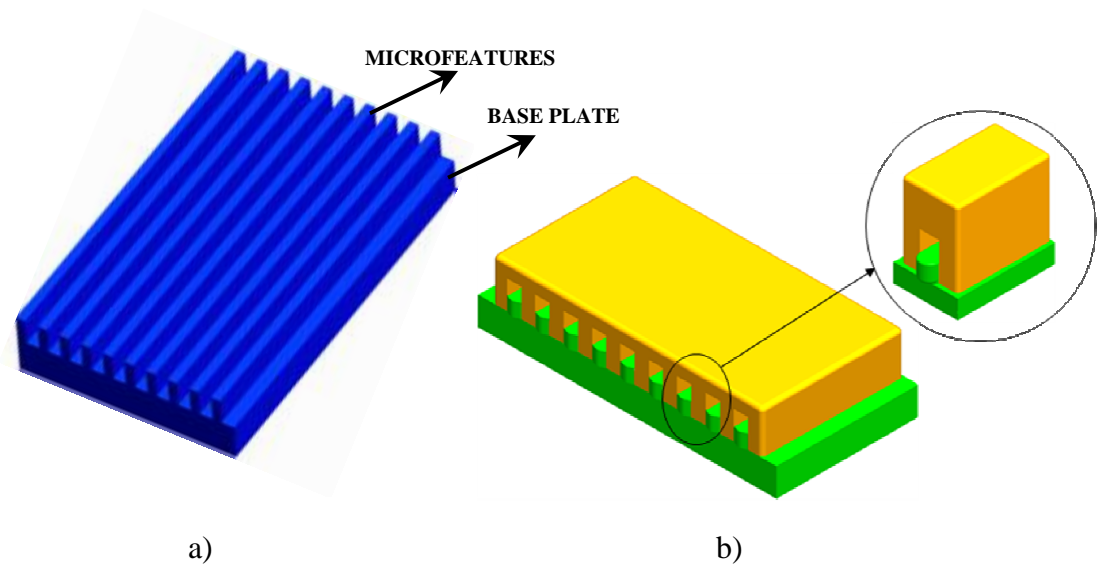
a) Hot-embossing mold and b) open-mold design resulting in lateral squeeze-out flow.
